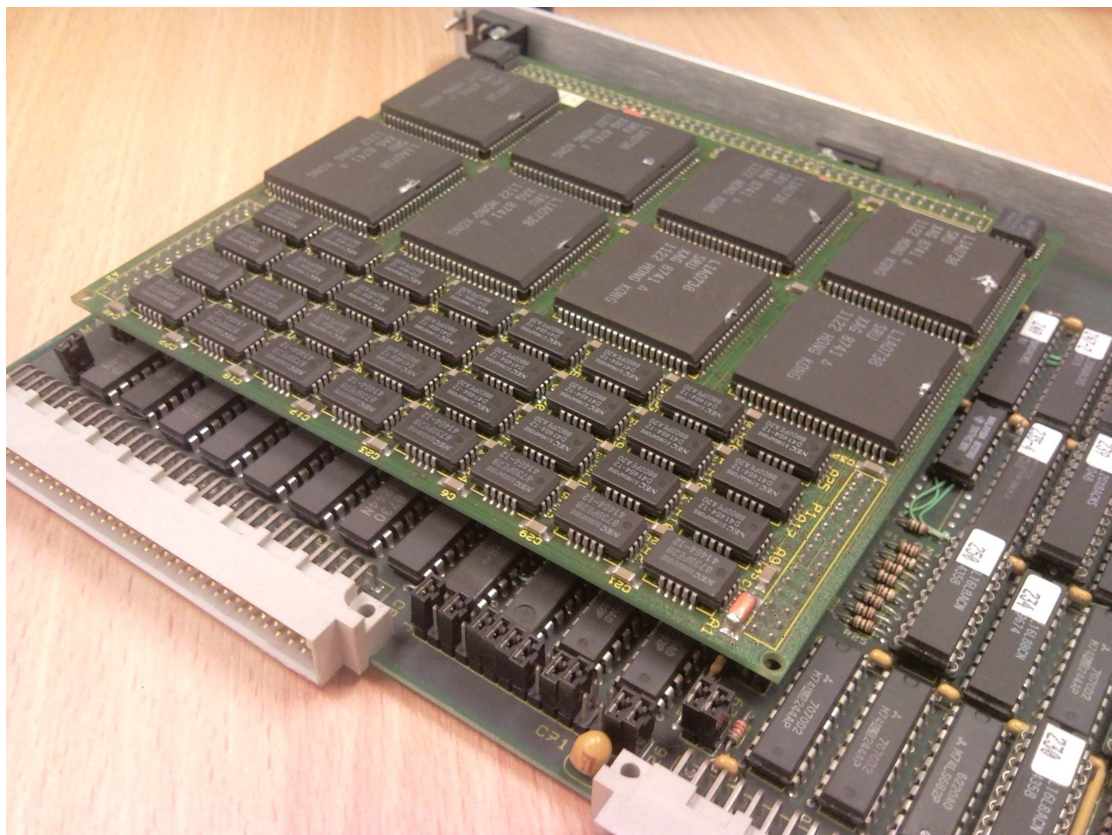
Heurikon HSE-10R board 2 rear three-quarter view
